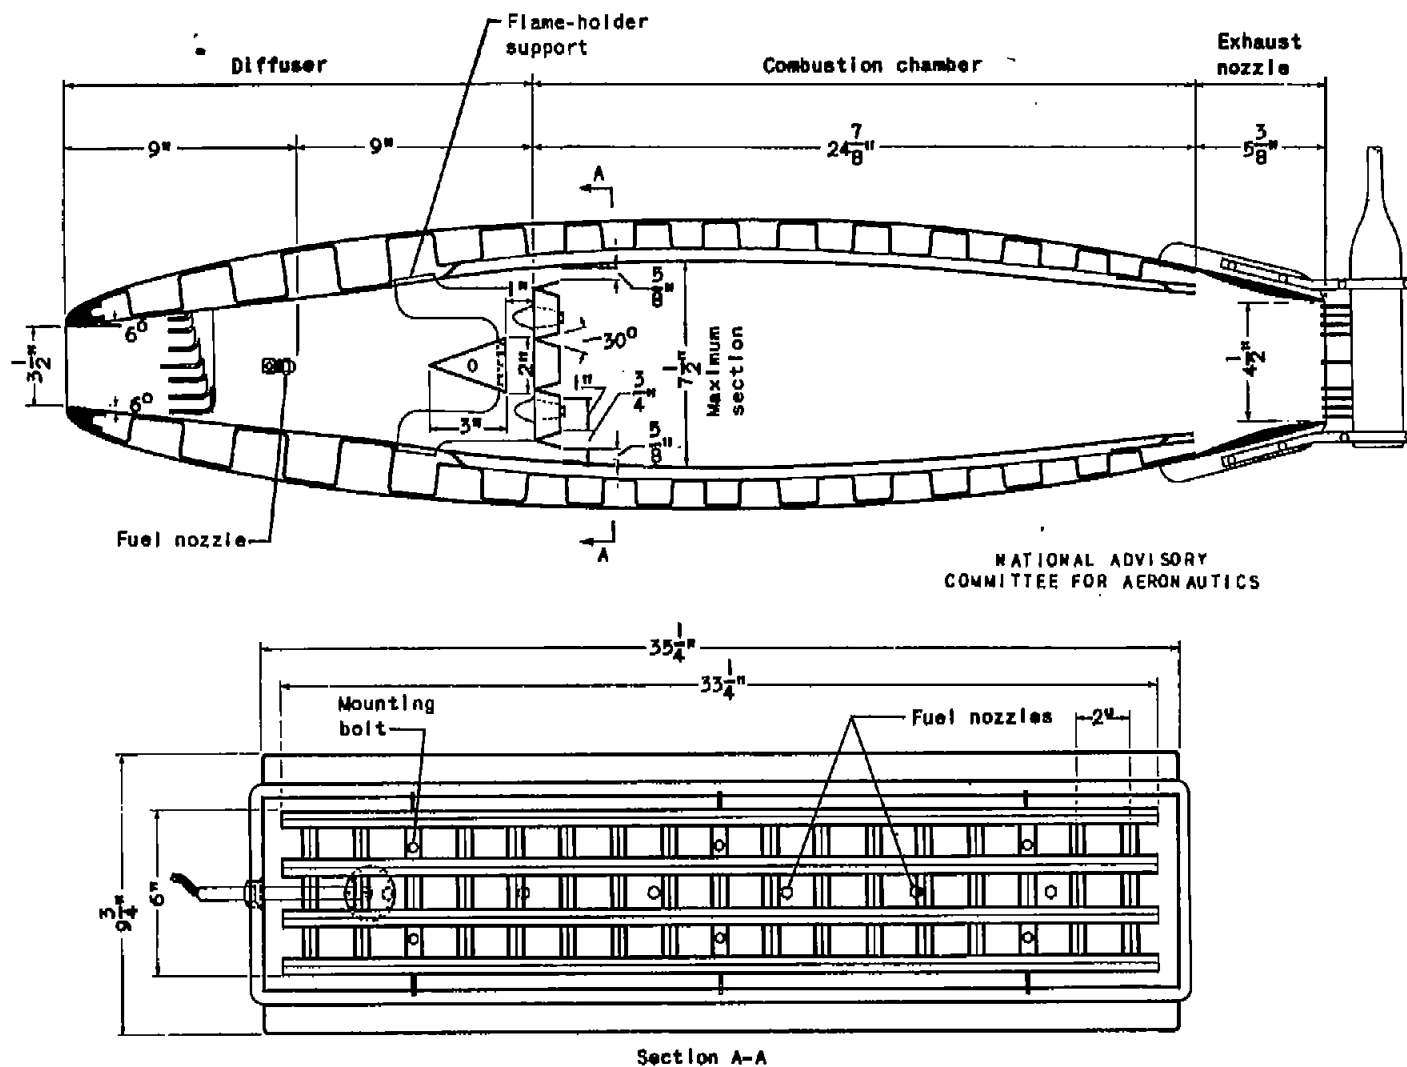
Schematic drawing of rectangular ram jet incorporating four-V gutter-type flame holder.
